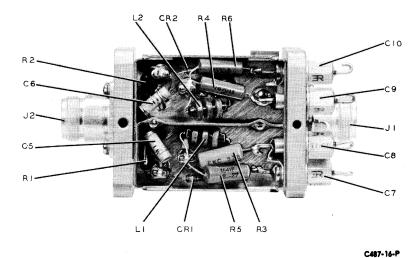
Directional Coupler, Bottom View Showing Location of Parts
